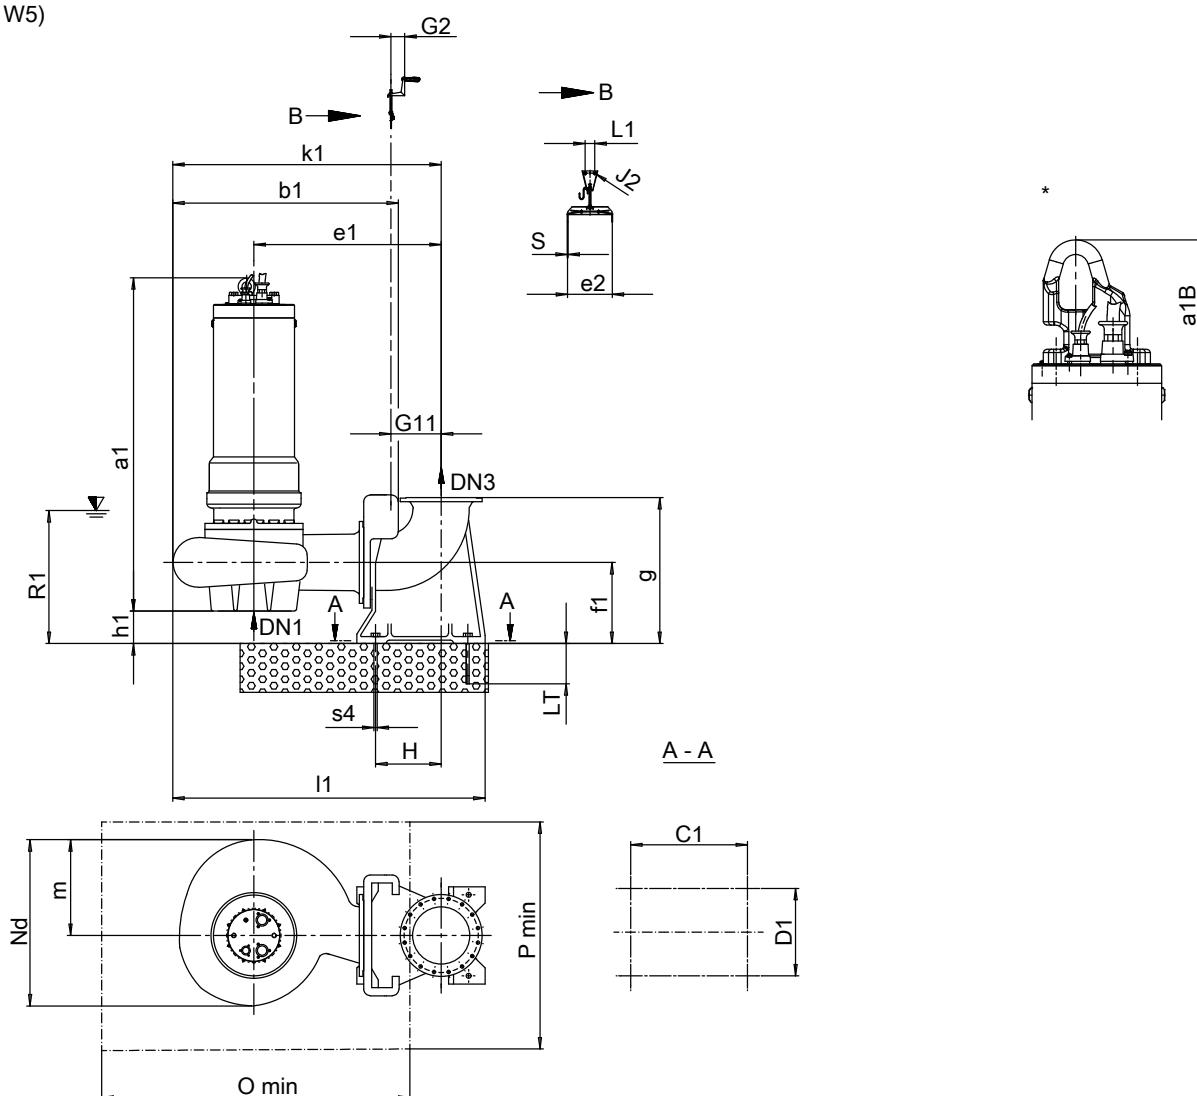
General arrangement drawing W5, stationary on duckfoot bend, guide wire arrangement, single-level foundation, without foundation rail, small upper holder, motor version N
